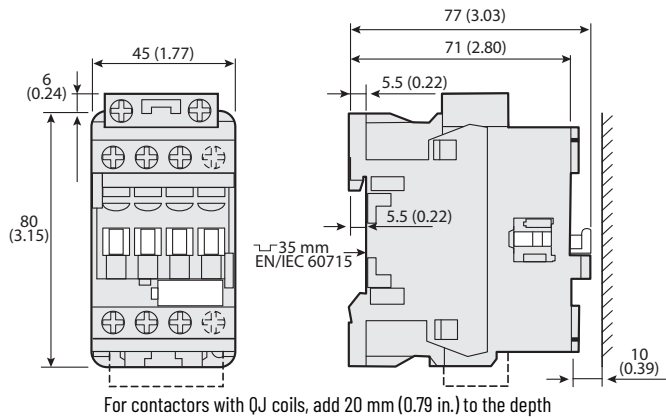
100-E09...100-E16 Contactors with Standard Coils and Side-mounted Auxiliary Contact
